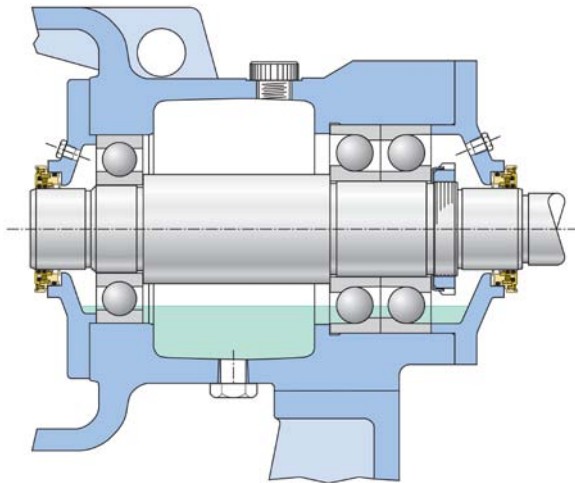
Typical pump bearing housing with oil level reaching to center of lowermost rolling elements. Here, keeping the DN-values below 6,000 reduces the risk of oil overheating (Ref. 1, pp. 232)
